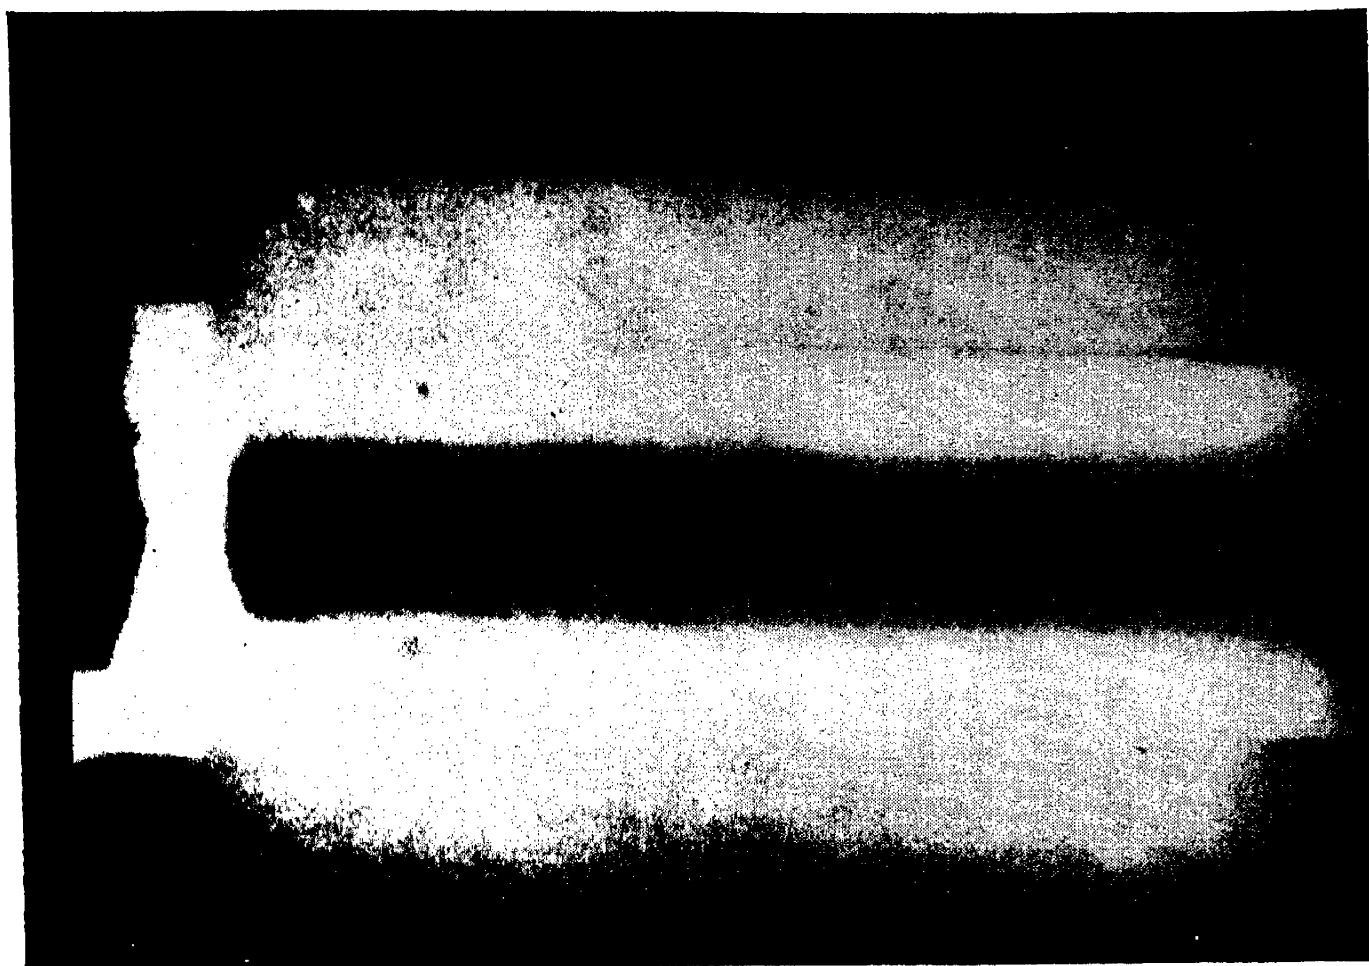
Porosity in steel casting for cylinder liner.
